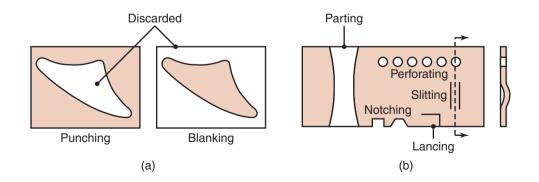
(a) Punching (piercing) and blanking. (b) Examples of various die-cutting operations on sheet metal. Lancing involves slitting the sheet to form a tab.
